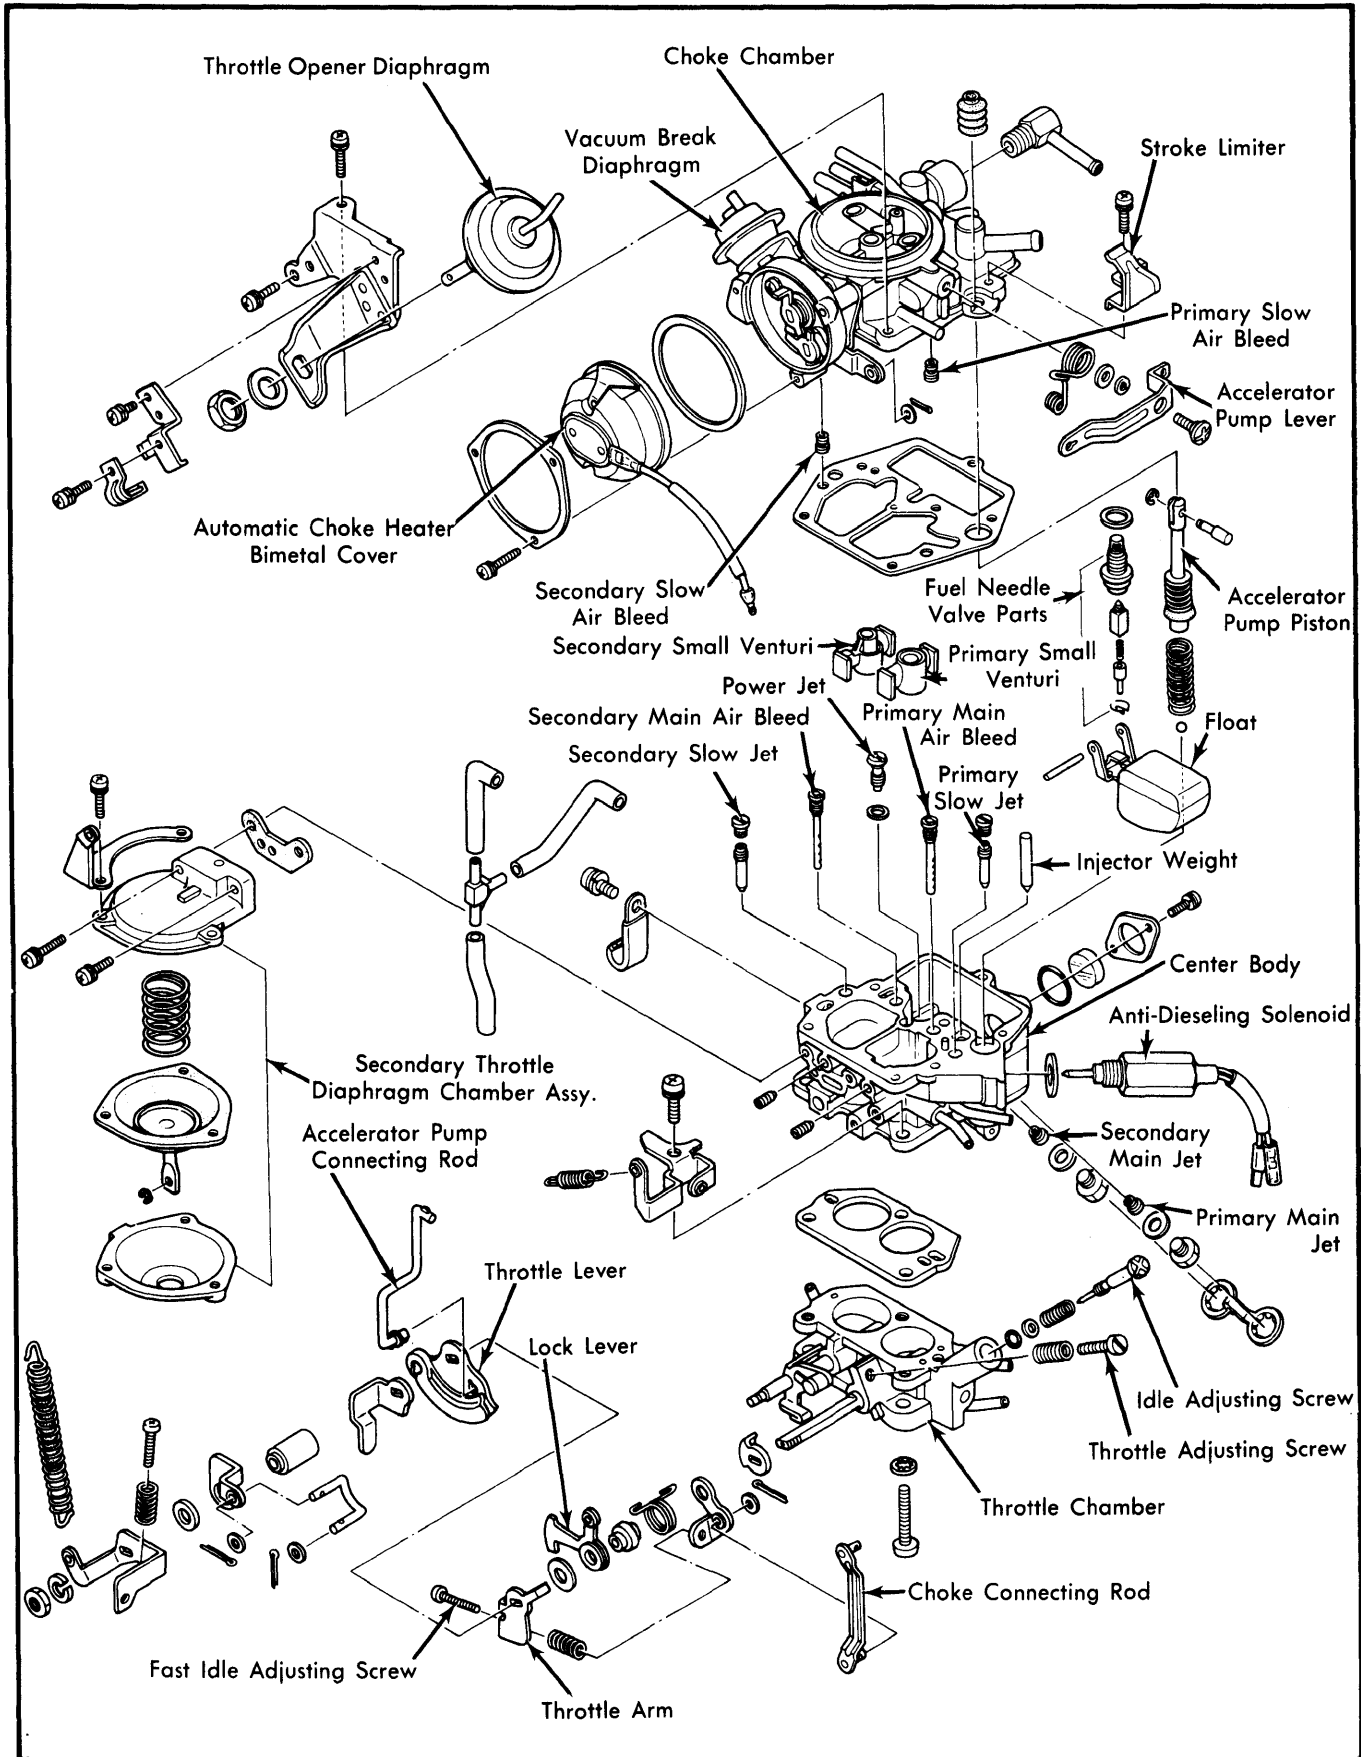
Exploded View of Datsun 210 & 310 Hitachi DCR 306 Carburetor
